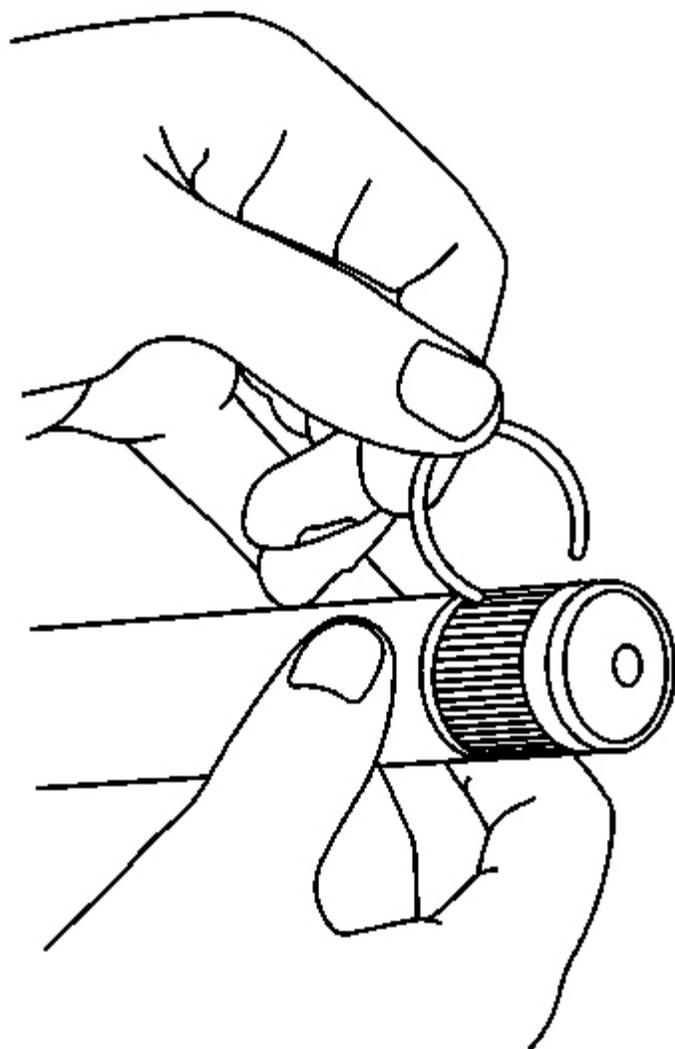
View Of Swage Ring, Joint Boot & Boot Groove
